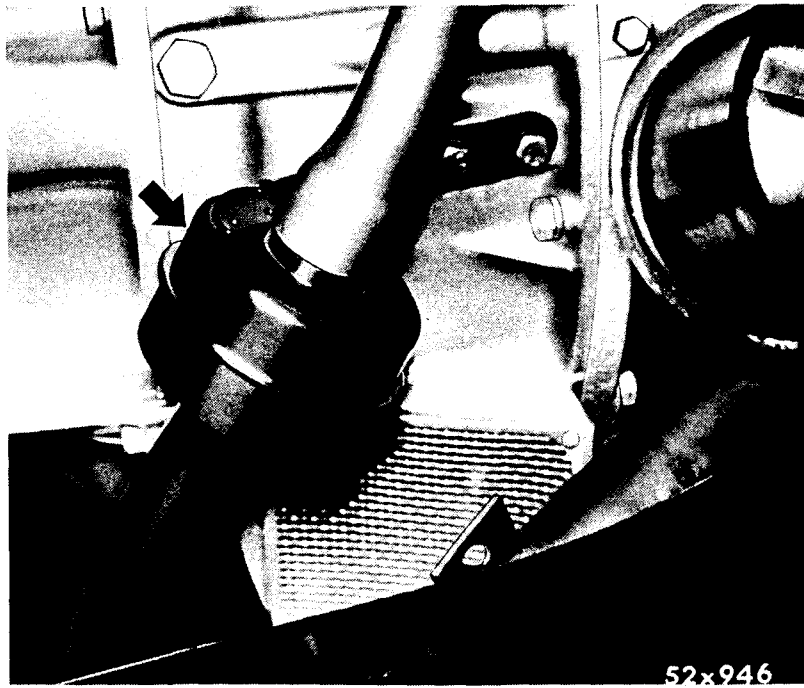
Crankcase Ventilation Outlet Pipe Air Cleaner
